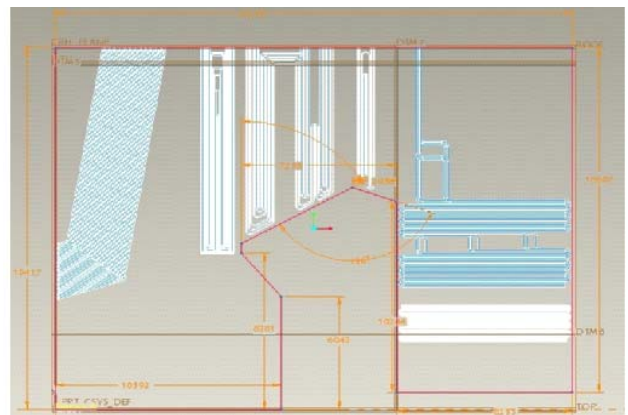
2D view of the boiler model. Boiler geometry showing all pressure parts. The fig shows the domain of interest.
